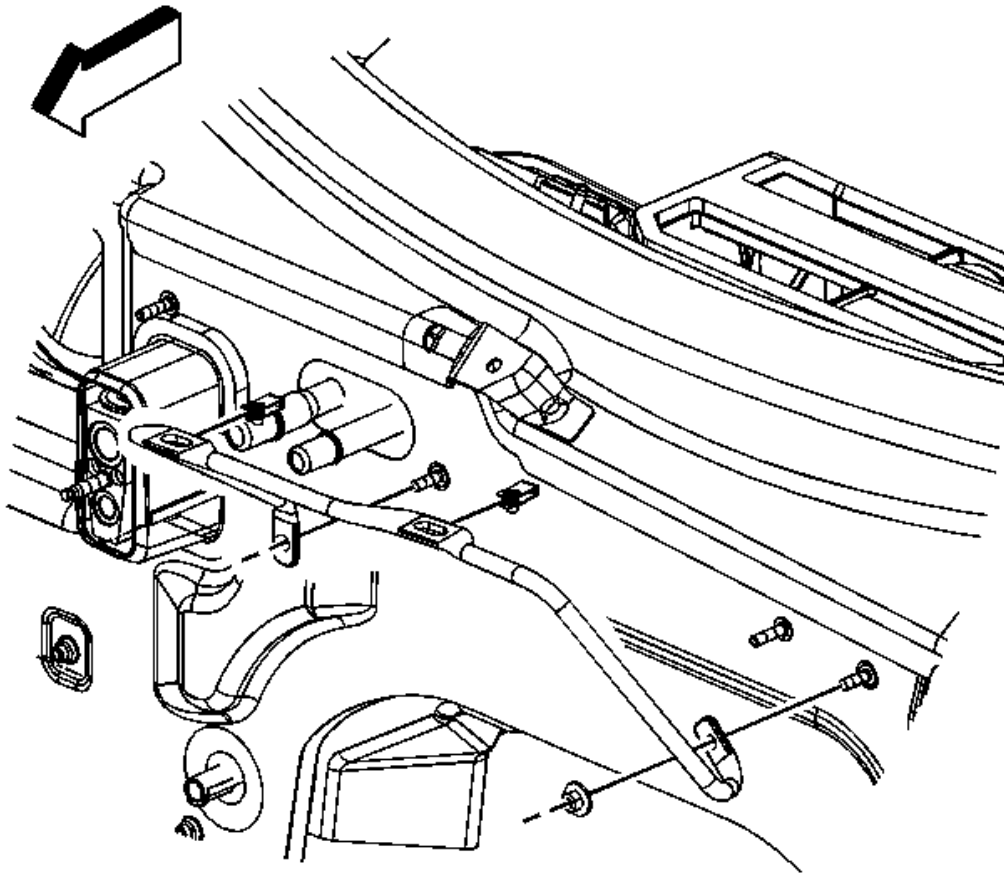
View Of Intake CMP Sensor & Air Inlet Screen Support
